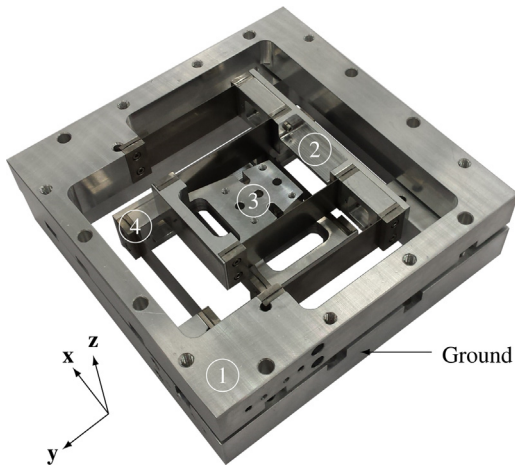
Two stages assembled for the 2-DOF compound planar spring prototype. Frames dimensions  $150 \times 150 \text{ mm}^2$ .
